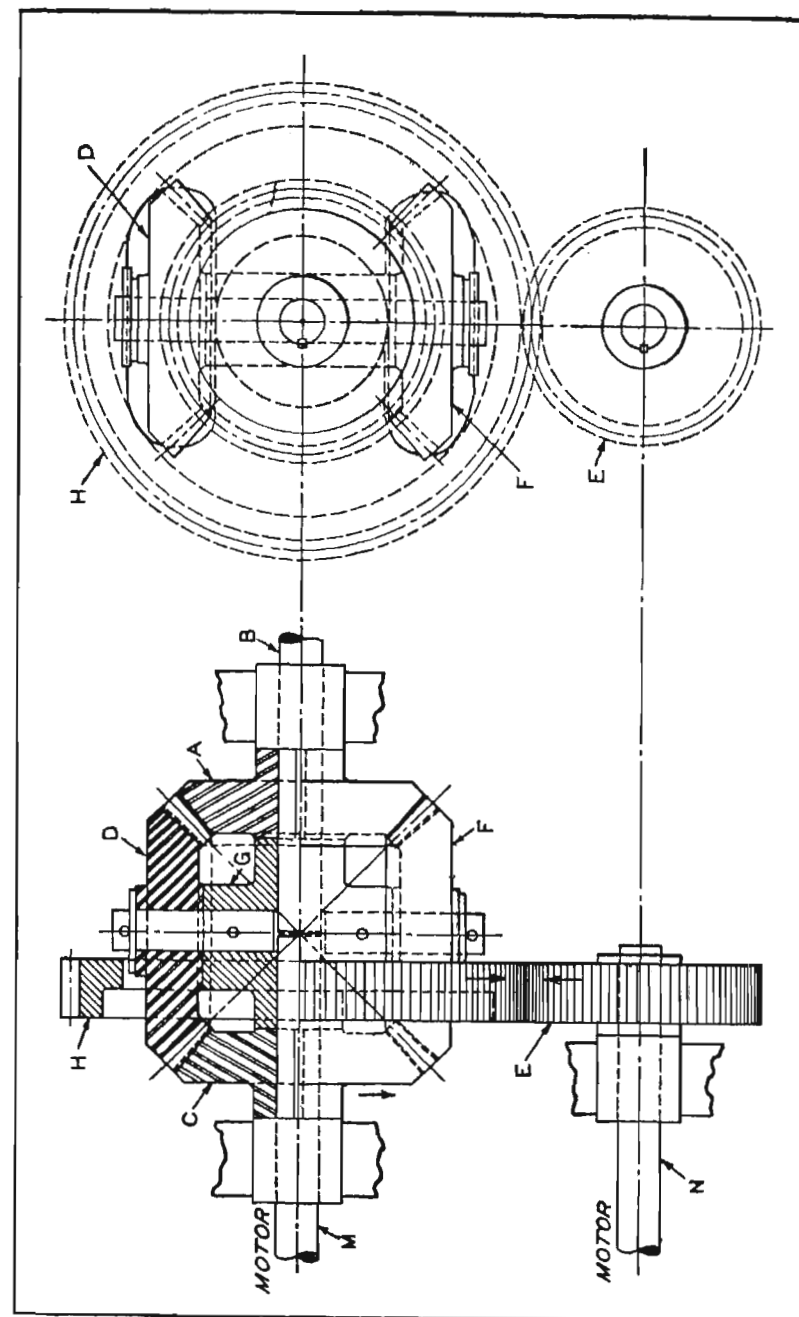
Mechanism for Controlling Driven Shaft by Changing Speeds of Two Driving Motors.
